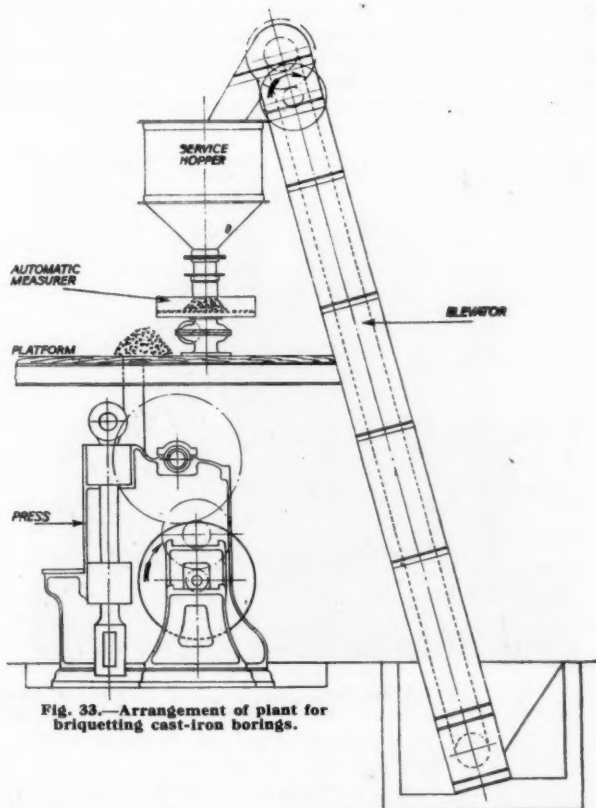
Arrangement of plant for briquetting cast-iron borings.
